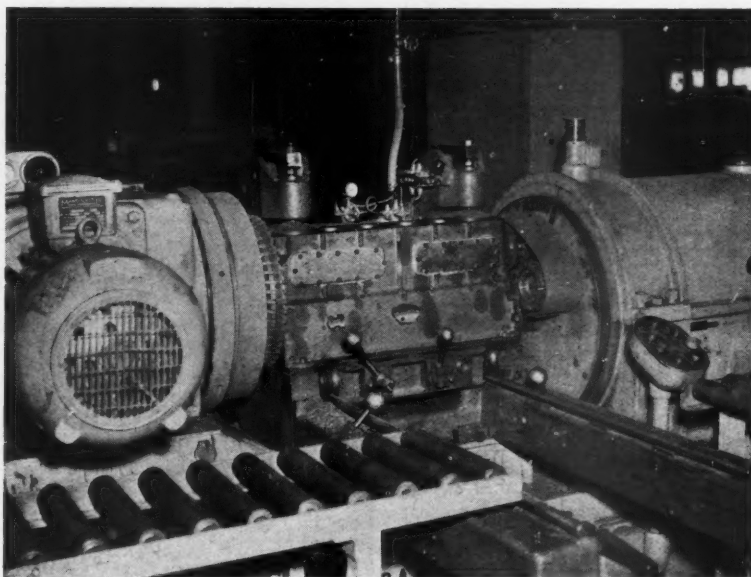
Milling the end faces simultaneously on an Archdale combined plain horizontal and planetary milling machine.
